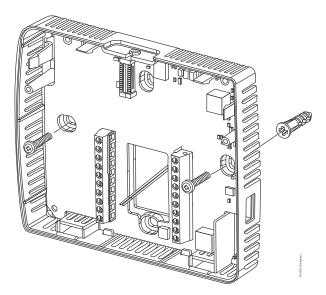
Securing the Thermostat Controller Mounting Base to the Wall
